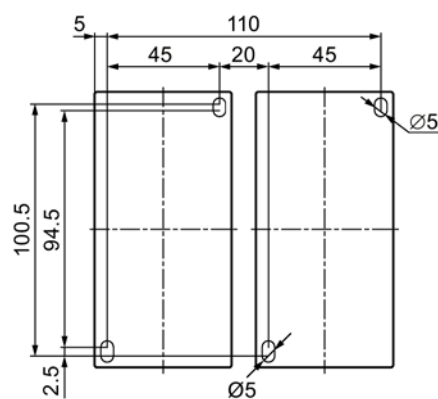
Drilling plan 3RA233 reversing contactor assembly
